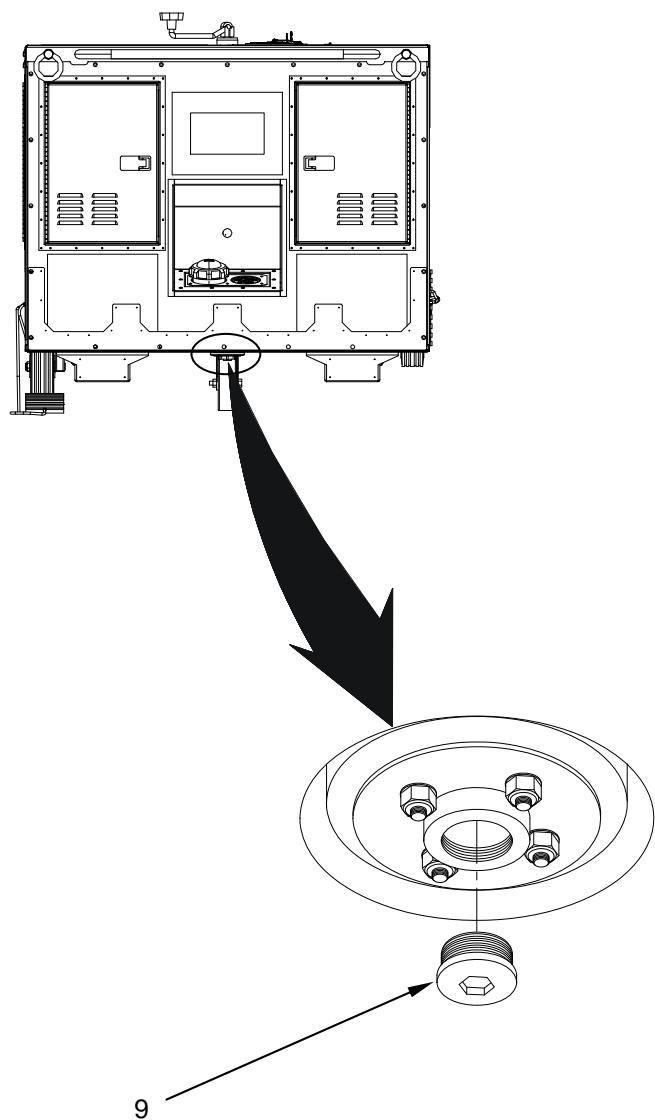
Fuel Tank Assembly (Sheet 2 of 5).
